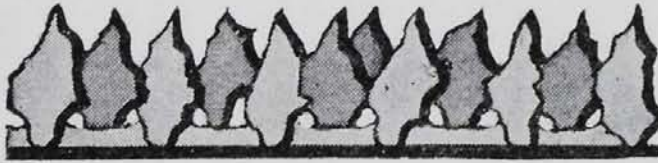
Enlarged view showing arrangement of particles on surface of sandpaper.
